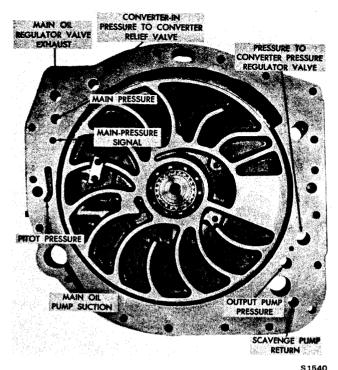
Front of retarder housing (CBT, CLBT, VCLBT)—oil passages
